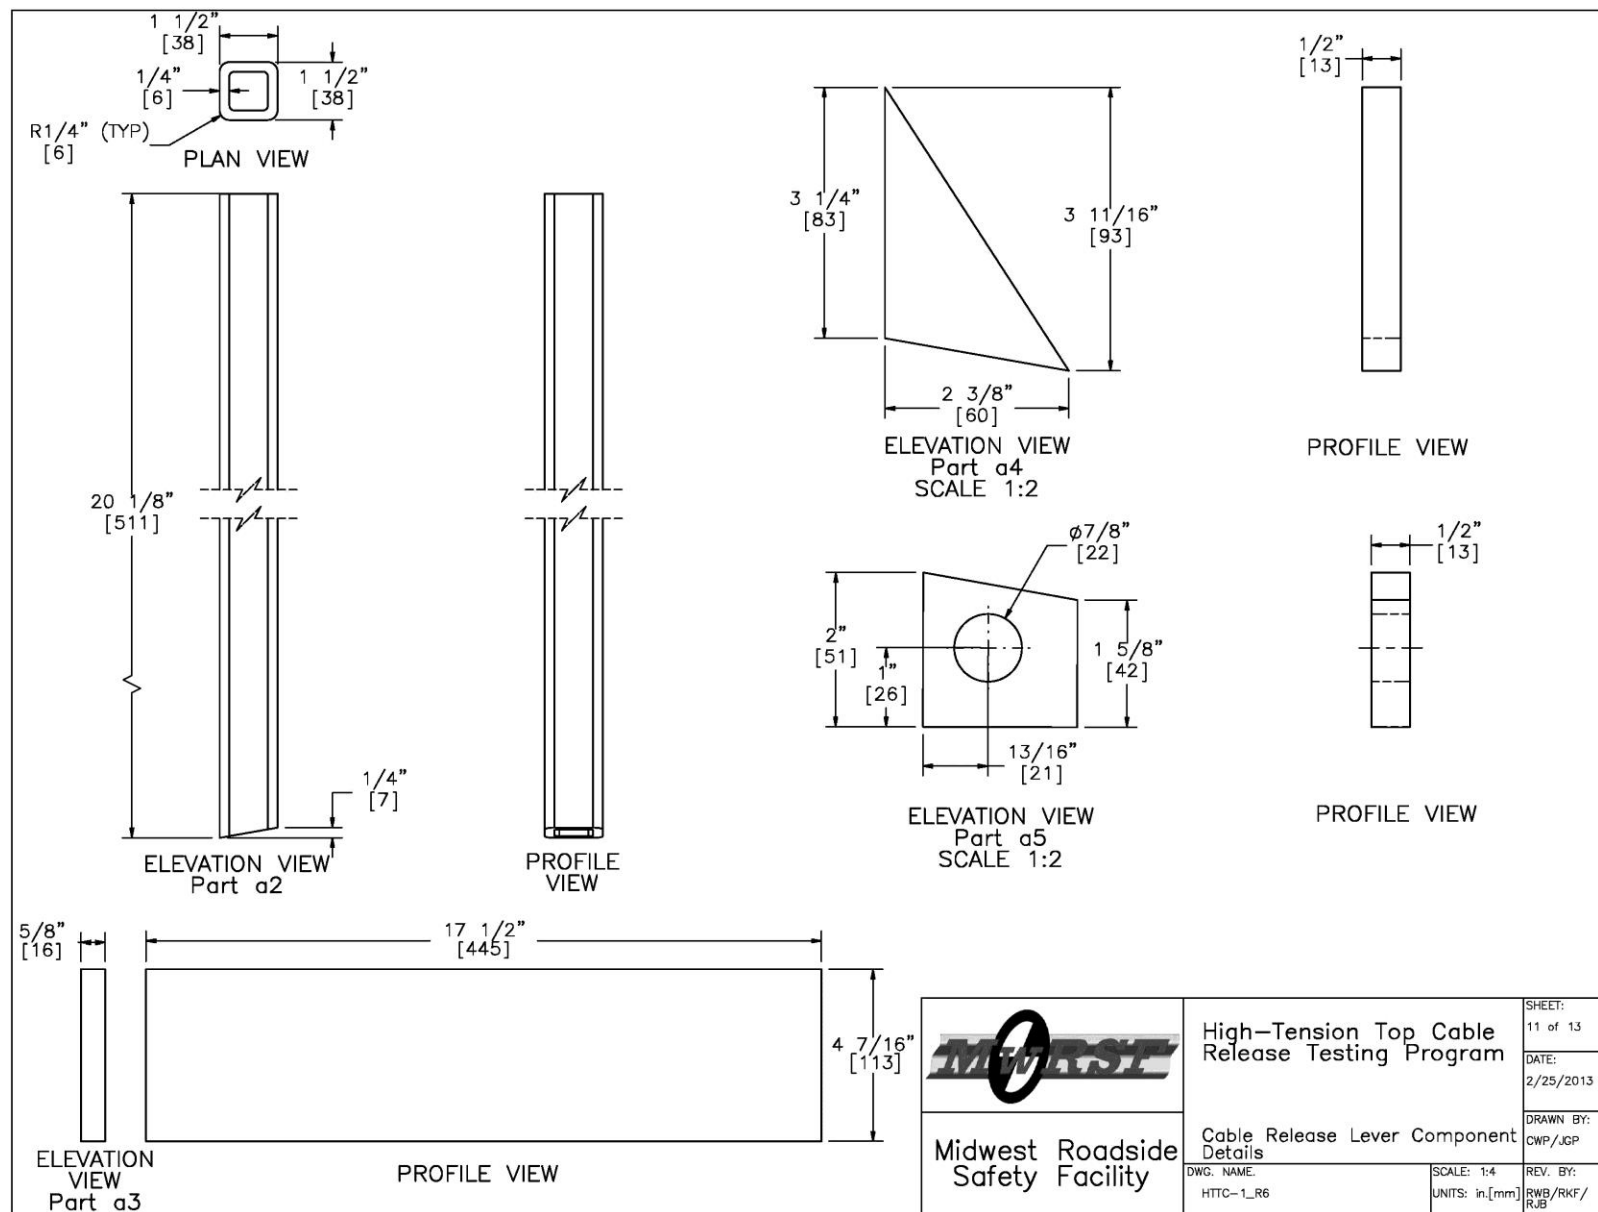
Cable Release Lever Component Details, Test No. HTTC-1
